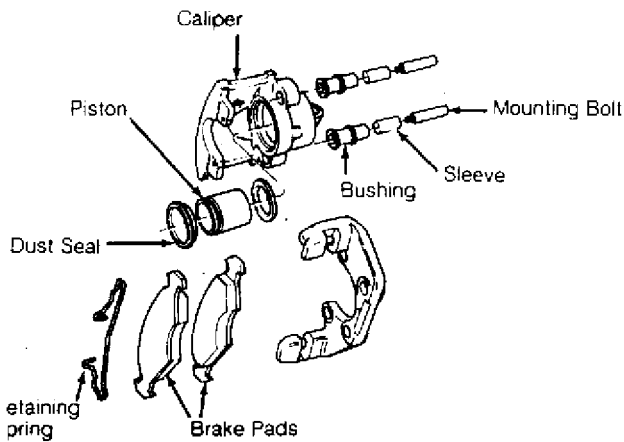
Identifying Front Disc Brake Components (Fox)
